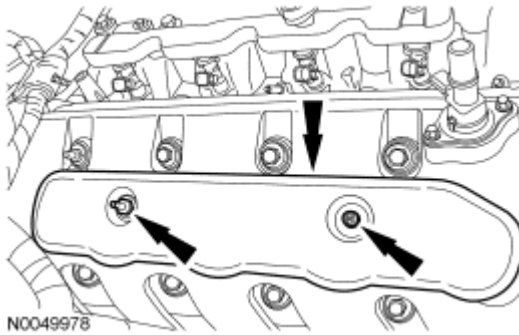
Locating RH Coil-On-Plug Cover Bolt & Stud Bolt
